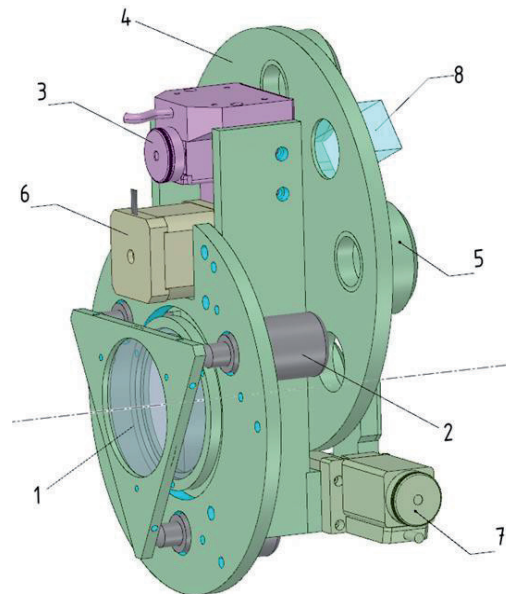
Pre-slit unit design. 1 – corrector plate, 2 – step actuators, 3 – drive mechanism of the touret (4) of the phase-shift changing plate (5), 6 – drive mechanism of changing the angle of plate optical axes, 7 – polariser analyser input unit, 8 – calibration channel mirror.
